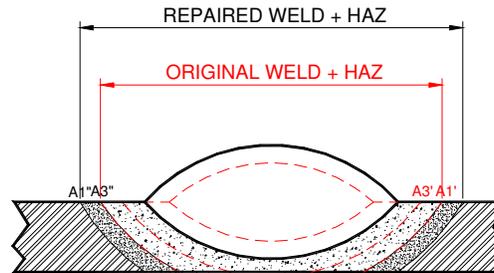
Repair welding process by overlapping the previous weld metal.
